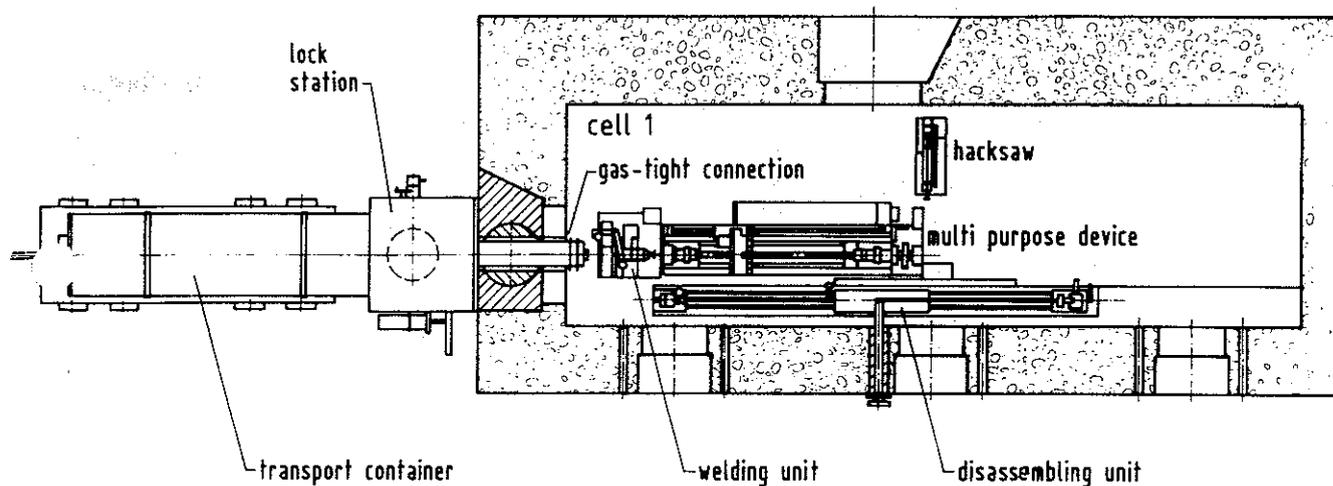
Arrangement of the four large devices for transfer, measurement, disassembly and welding in cell no. 1.
